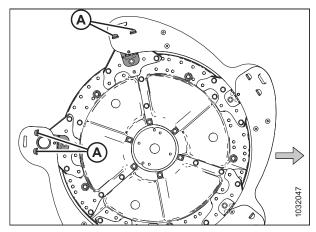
Reel Endshield Removed – Inboard Cam End
